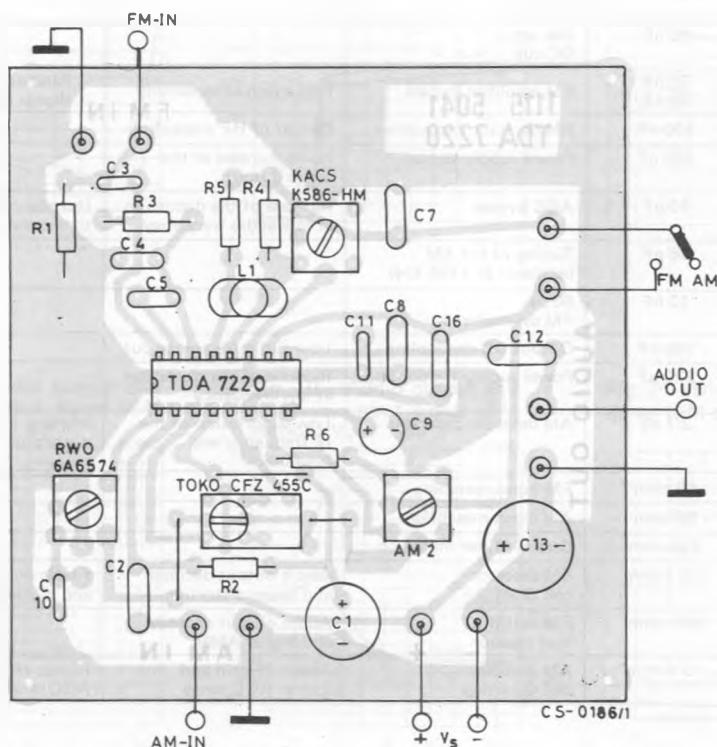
PC board and component layout (1:1 scale) of the test circuit
